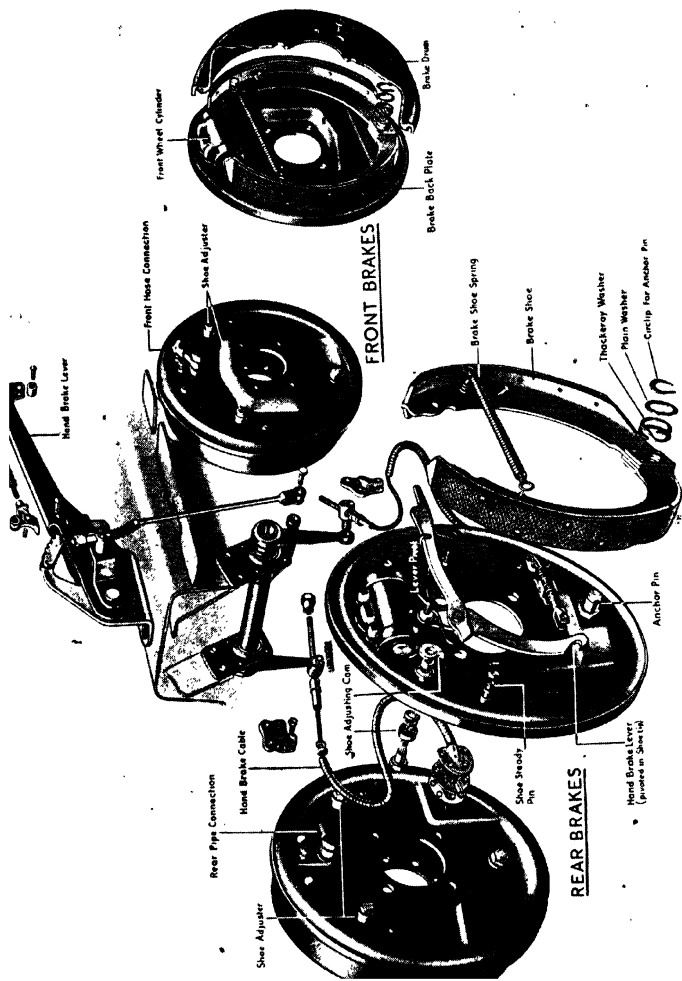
GENERAL LAY-OUT OF A LOCKHEED HYDRAULIC BRAKING SYSTEM (LESS MASTER CYLINDER) AND THE HAND-BRAKE CONNECTIONS
